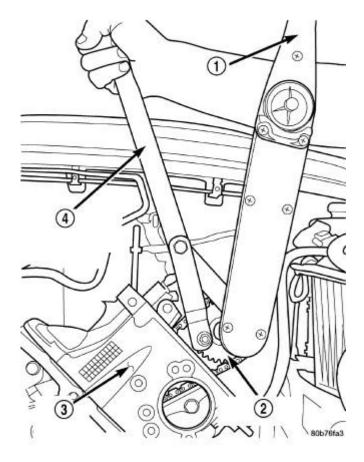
Camshaft Sprocket Courtesy of CHRYSLER LLC
